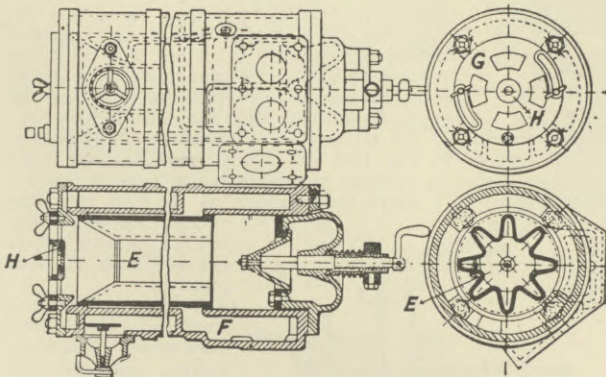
Samuelson Engine Vaporizer (longitudinal transverse section, plan and end elevation).
